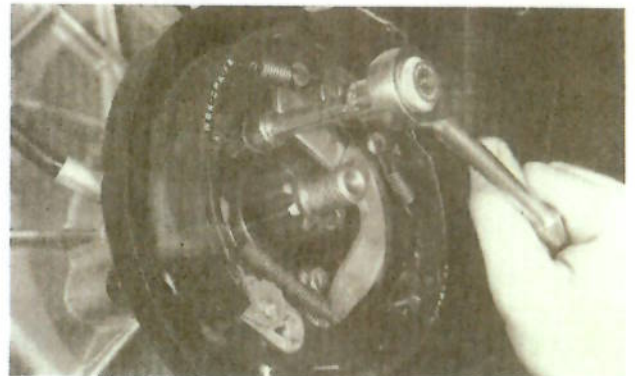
REMOVING THE CENTER BRAKE BACK PLATE FROM THE SPEEDOMETER GEAR HOUSING.
